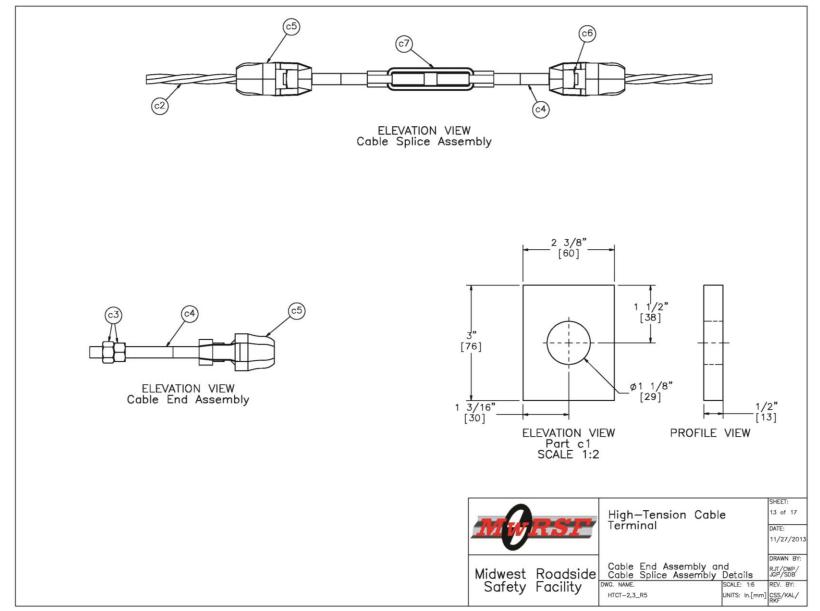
Cable End Assembly and Cable Splice Assembly Details, Test Nos. HTCT-2 and HTCT-3
